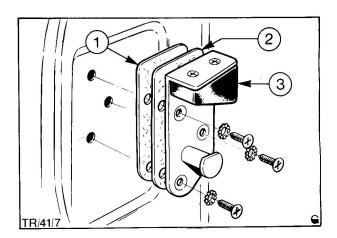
Floor striker assembly 1 and 2 – Shim 3 – Plate
